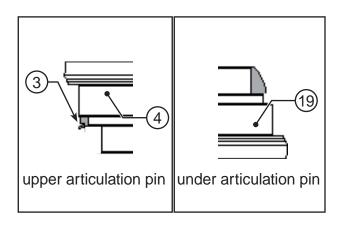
Using two levers, remove the top articulation pin (4) complete with front seal (9) and shims (3). Pay attention not to damage the surfaces.
